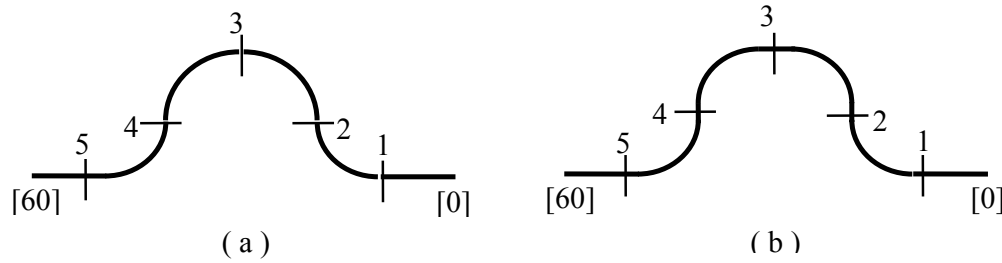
Drawbead position (between brackets) and drawbead locations for the round bead (a) and the rectangular bead (b).
